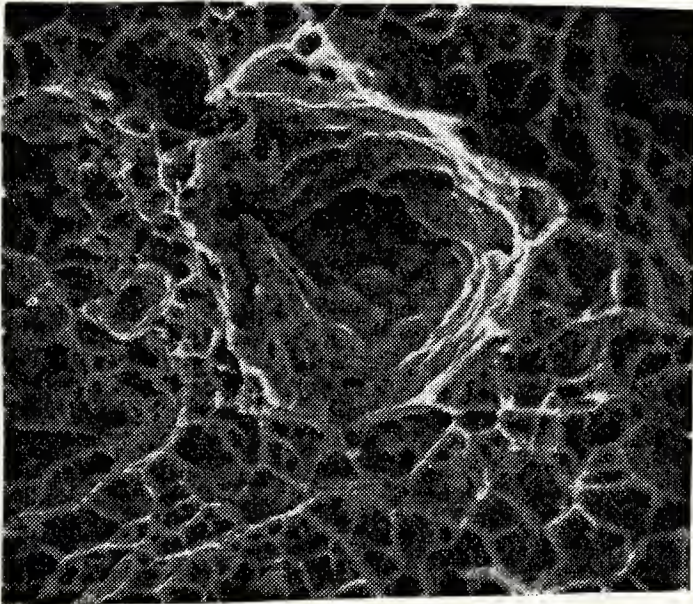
Observation of the fracture surface of a fourteen weld repaired sample. (620X). Porosity in the ductile overload zone is shown.
